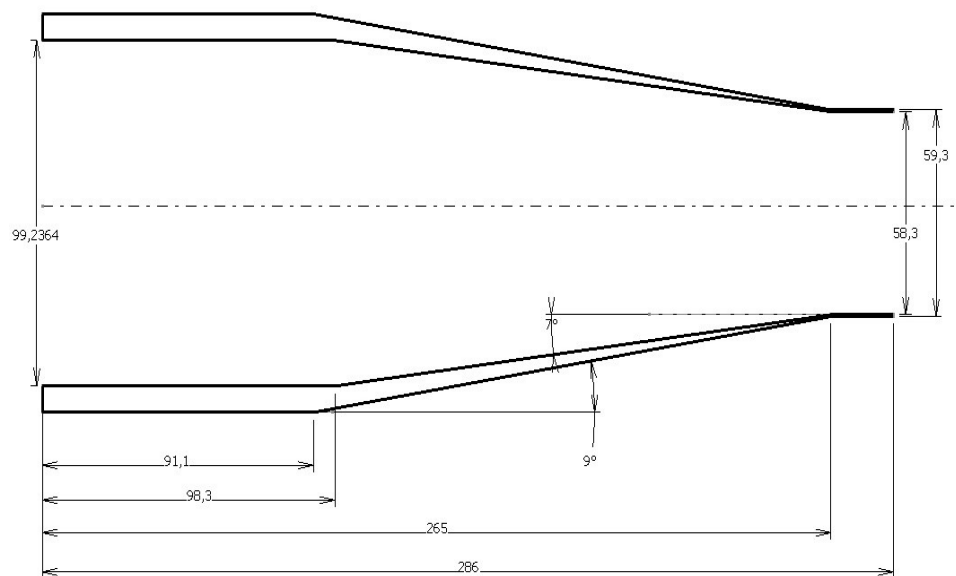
Sketch of the 58 mm nozzle used on the coaxial study.
